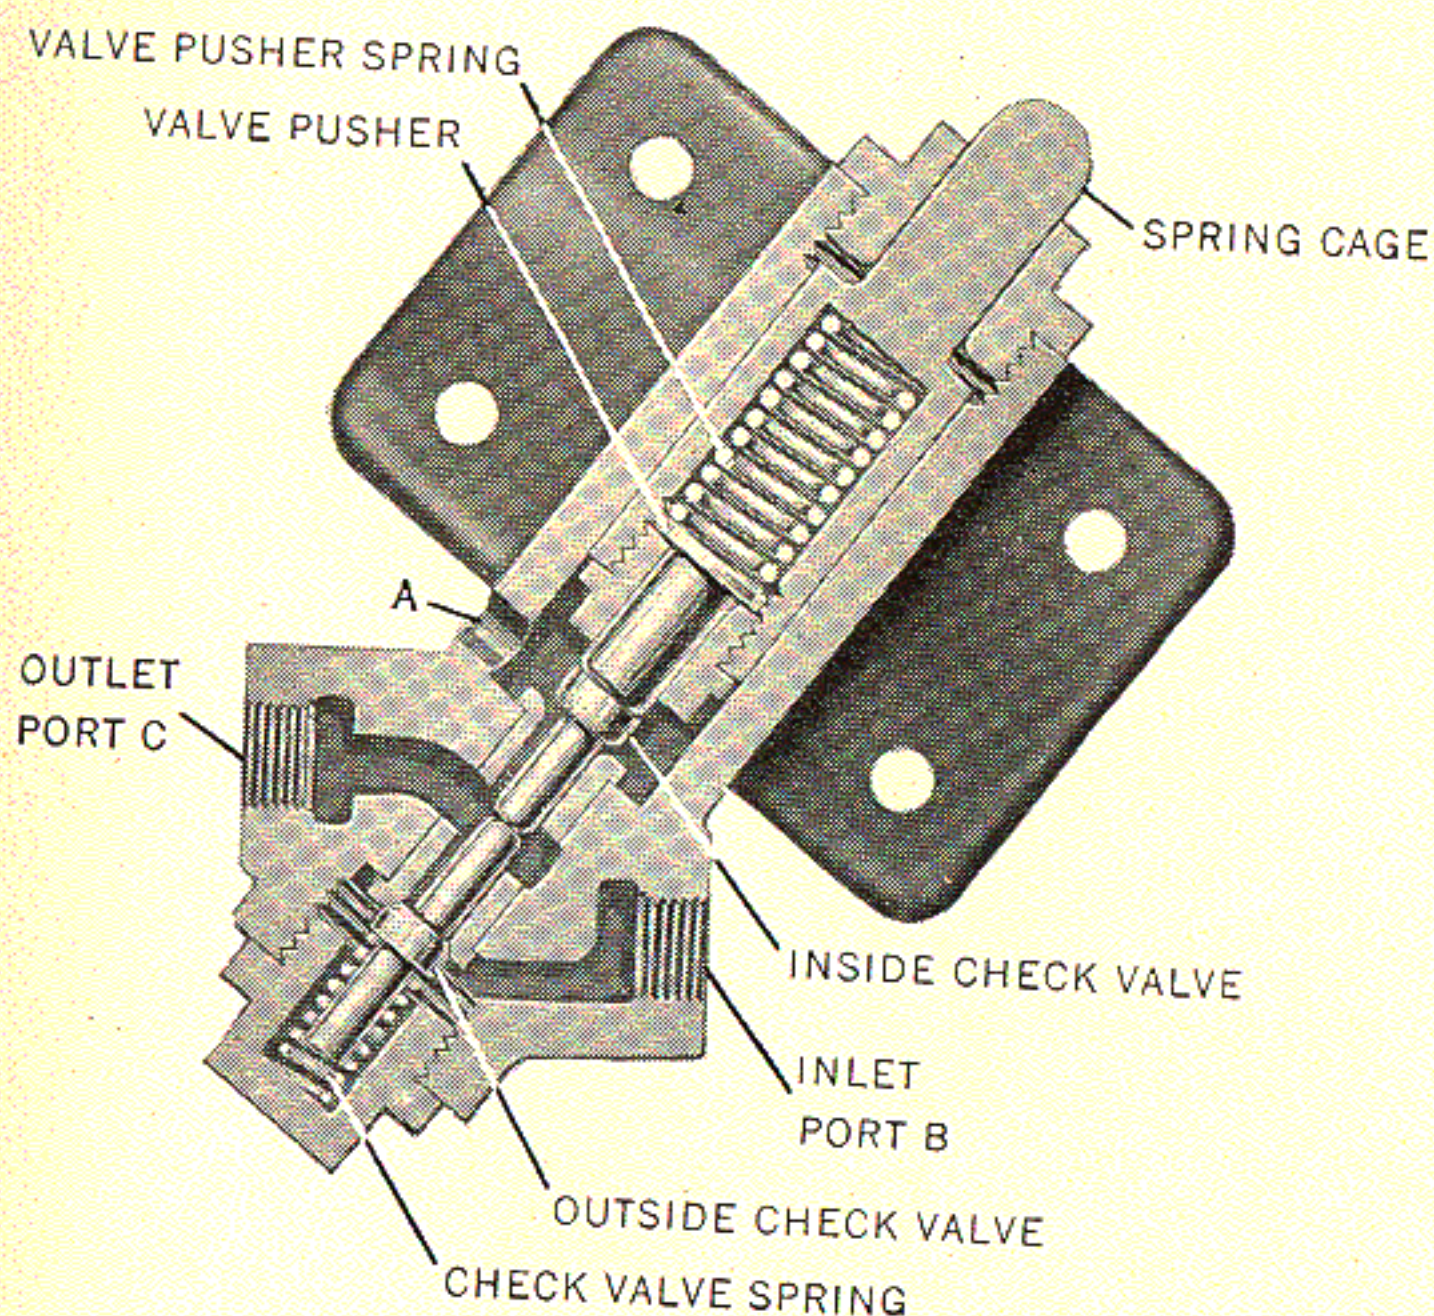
Type C-1 Booster Reverse Lever Pilot Valve; Release
